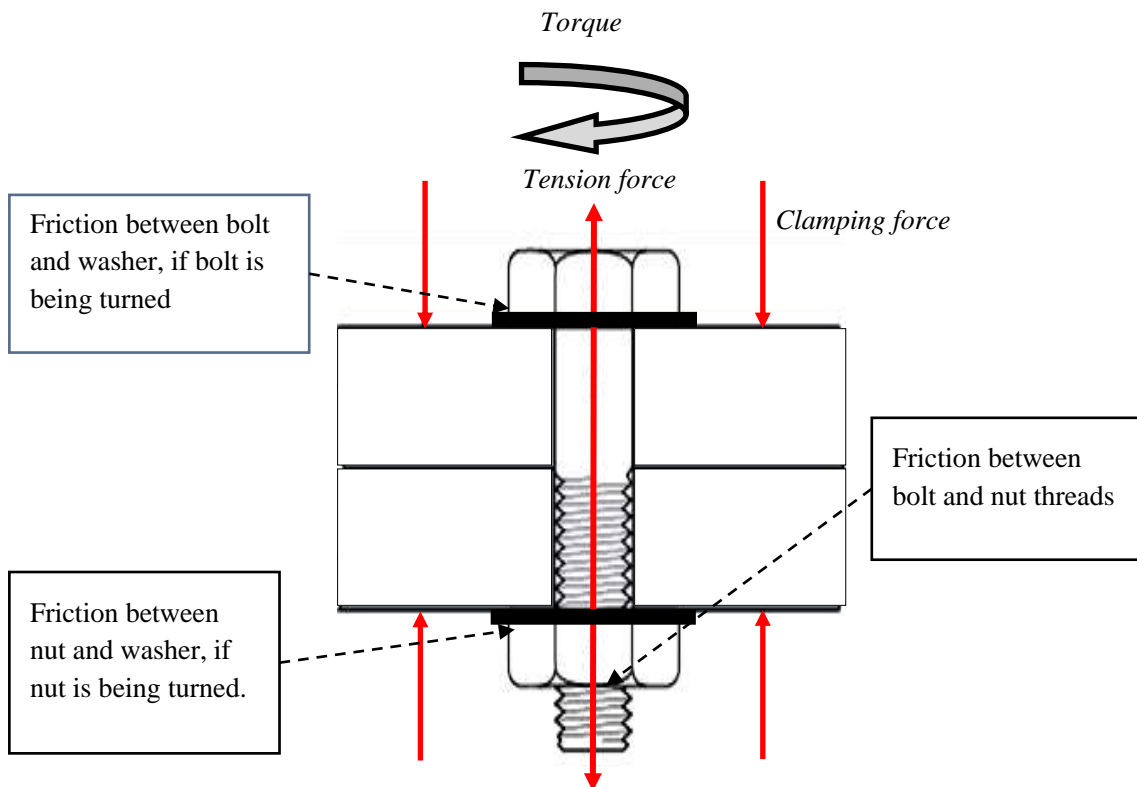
Schematic of a bolted assembly showing the tension force and sources of friction present
